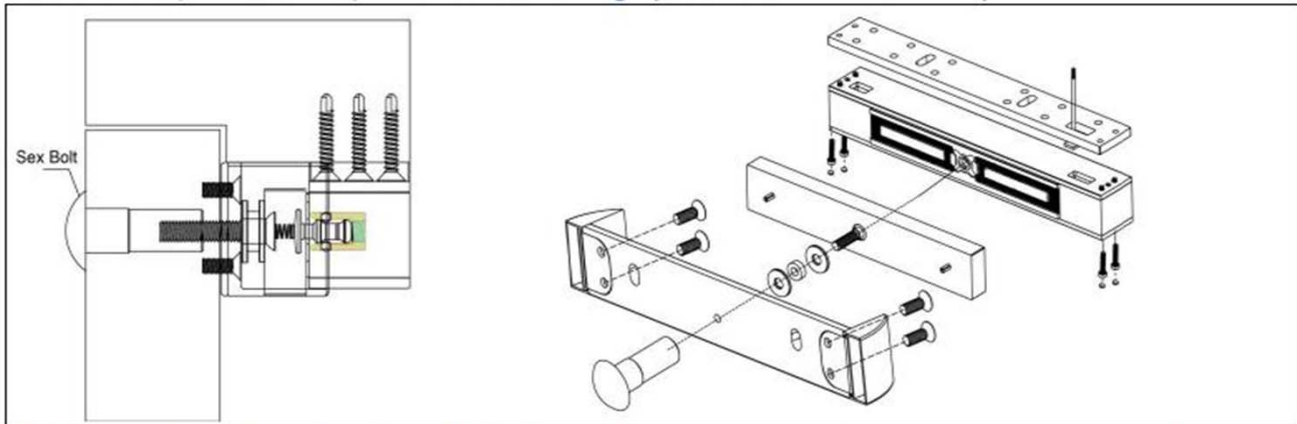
MEM2400-LP, Security Bracket (SEC 2400) and Sex Bolt installation for out-swing wooden door, sex bolt is used to enhance the holding strength of SEC bracket.
